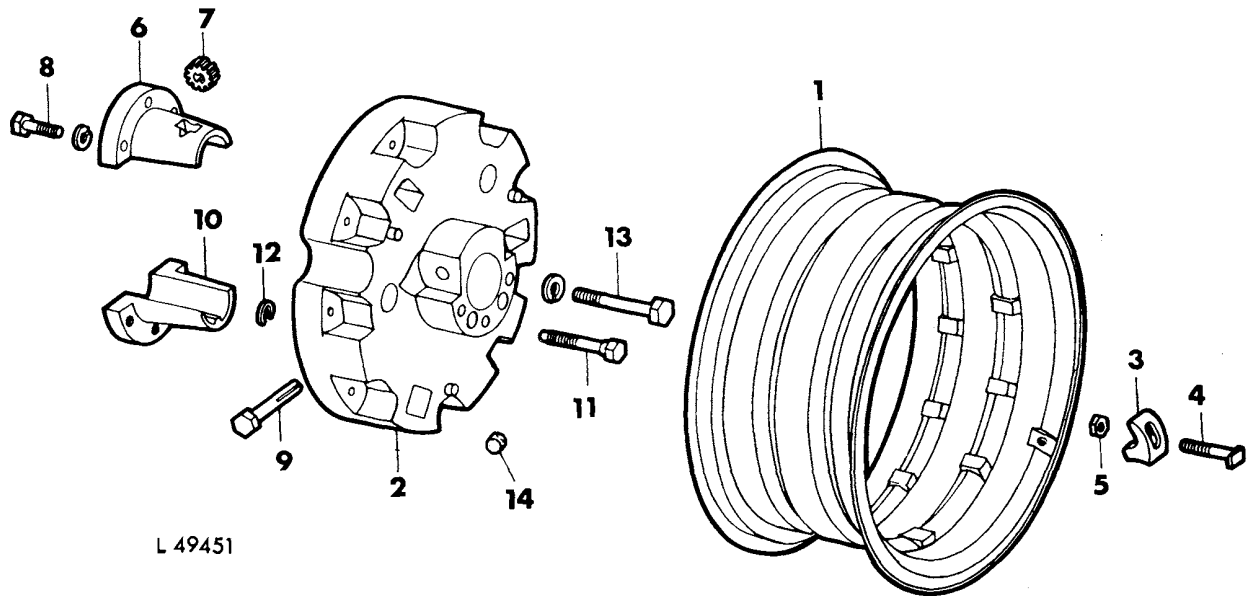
Exploded View of Rear Wheel with Rack-and-Pinion Axle
